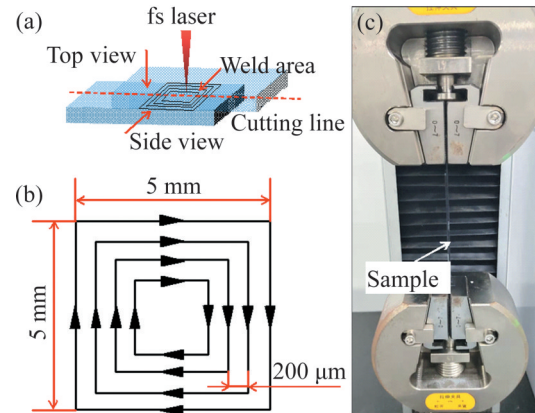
Welding process and tensile test setup: (a) The sample setup; (b) Welding path; (c) Shear tensile test
